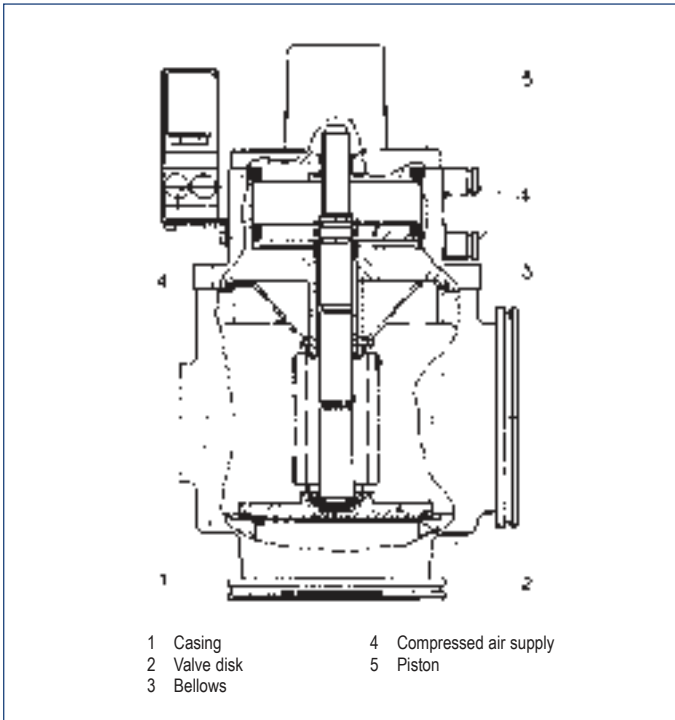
Right angle vacuum valve with electropneumatic actuator
